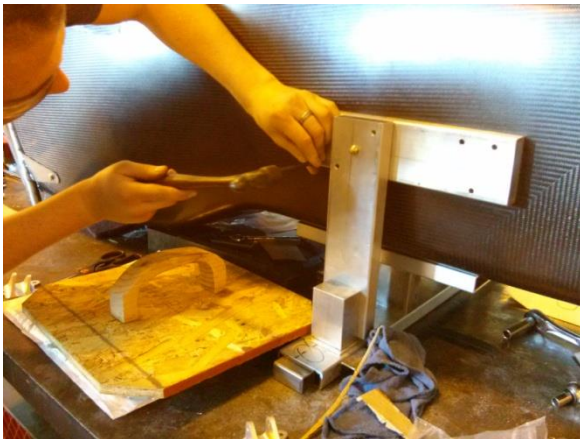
Using the suspension jig to locate the holes for mounting the front suspension mounts.
